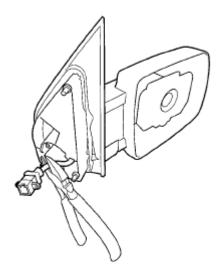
Identifying Power Mirror Actuator And Cover Courtesy of AMERICAN HONDA MOTOR CO., INC.
